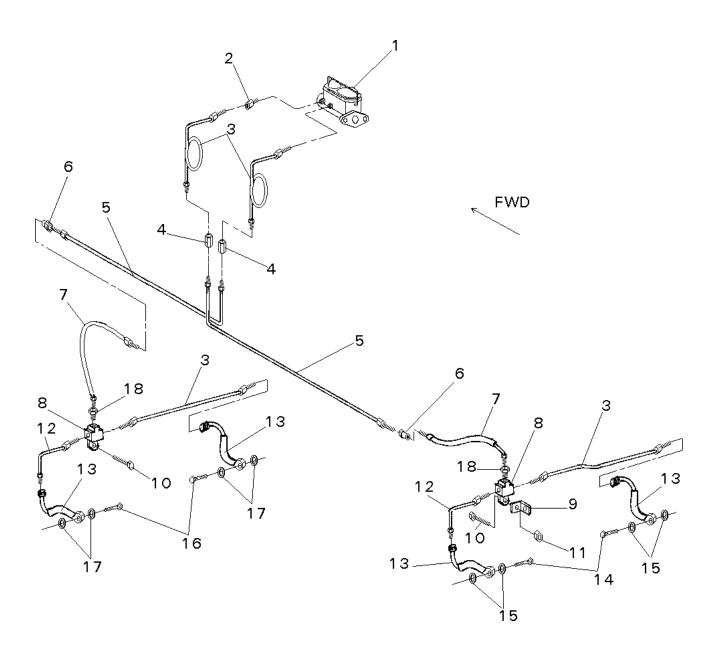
Brake System Assembly, Front Drum and Rear Disc Brakes
